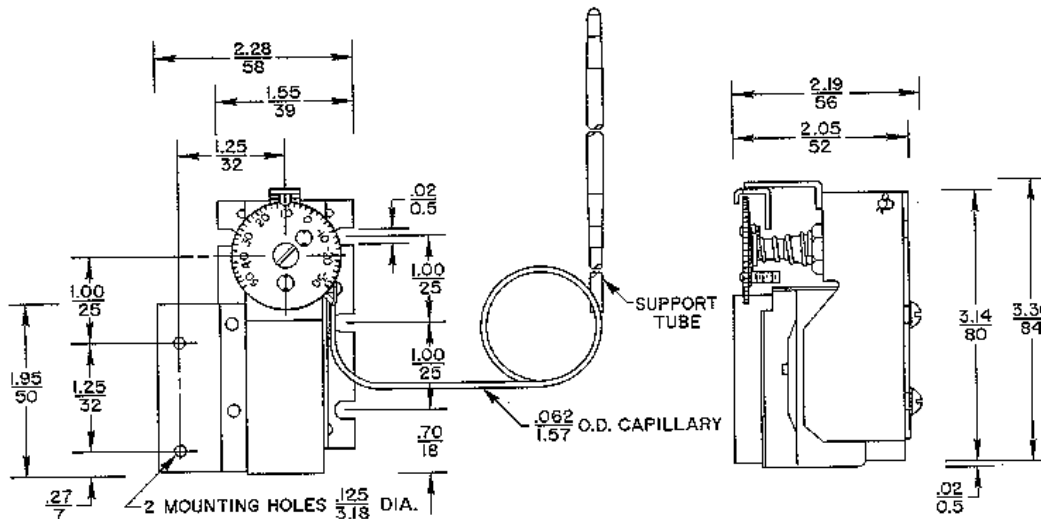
Side support, front mounting bracket, optional at extra cost.
